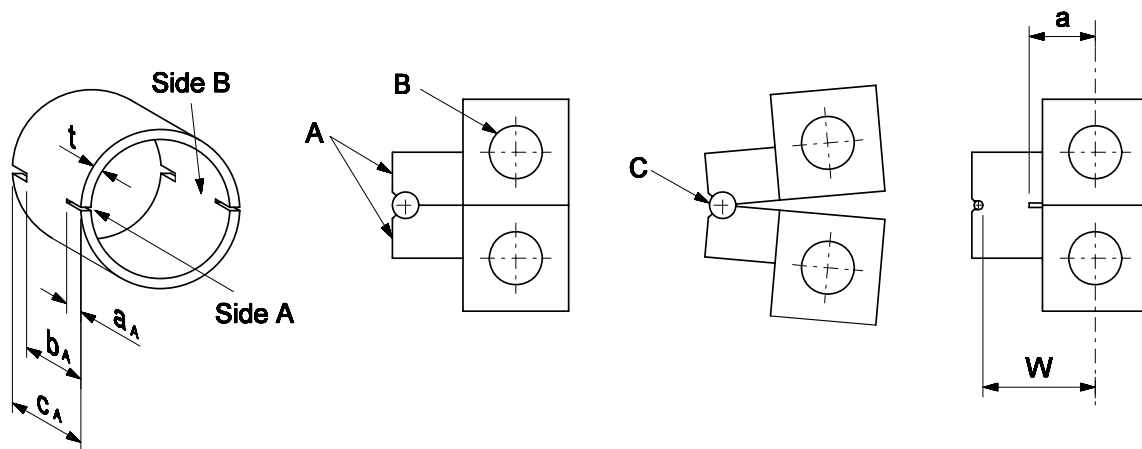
Schematic diagram of test specimen and pin-loading tension fixture.
